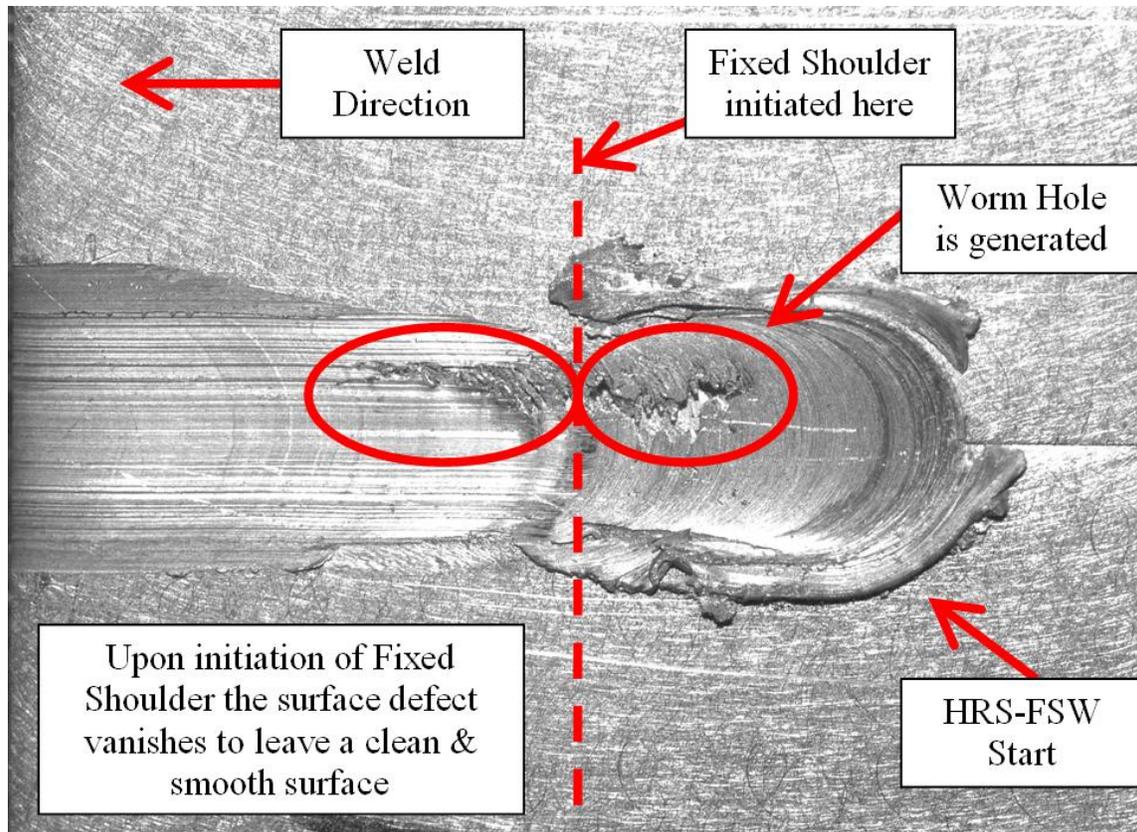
Generation of weld defect that dissipates after application of Non-rotating Shoulder
